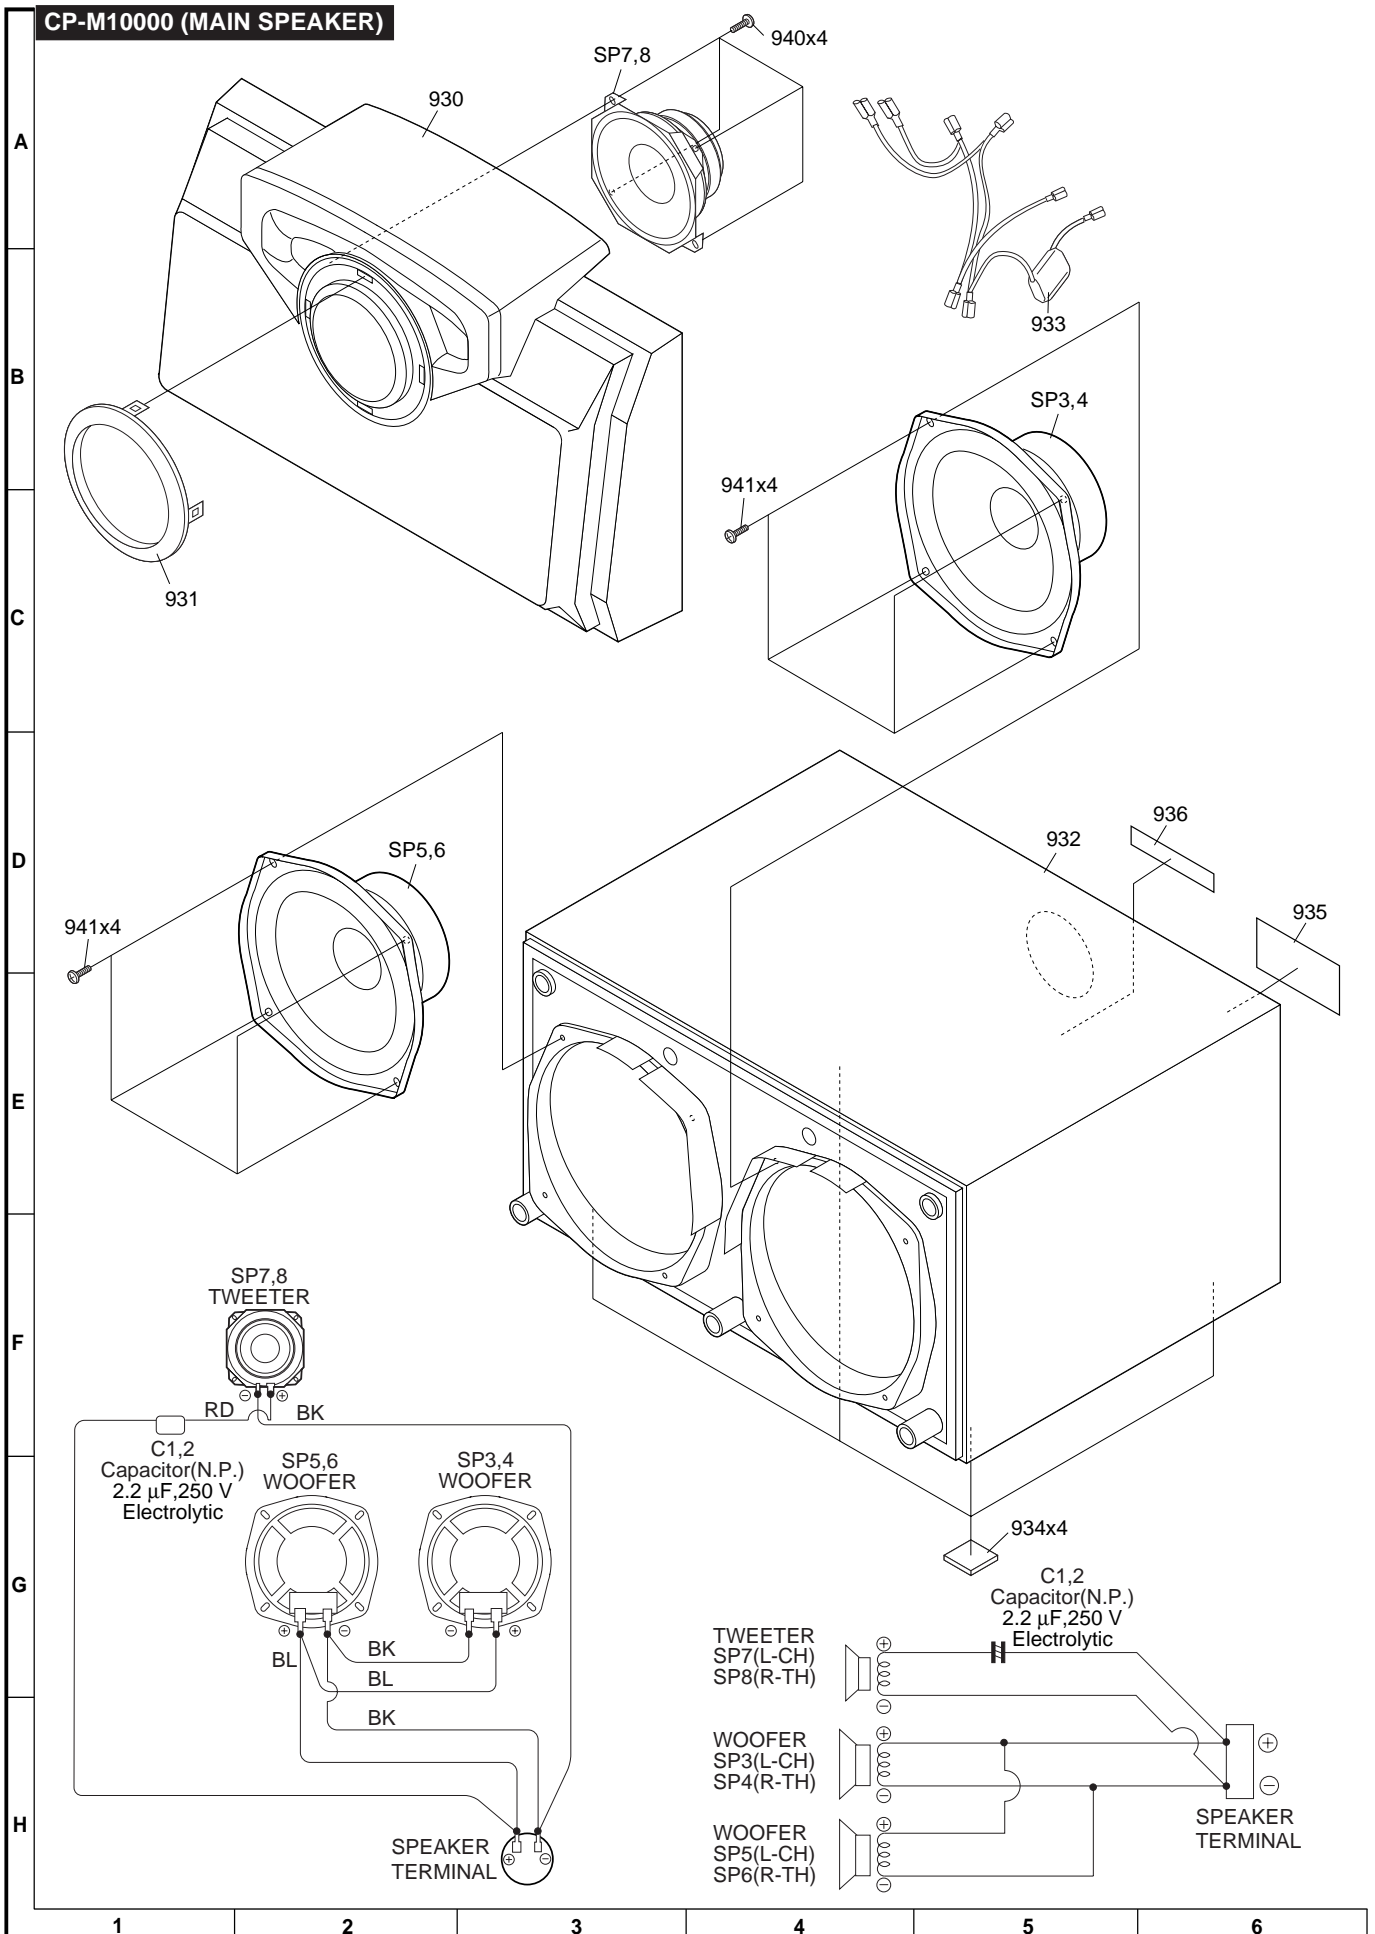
SPEAKER EXPLODED VIEW (2/2)
